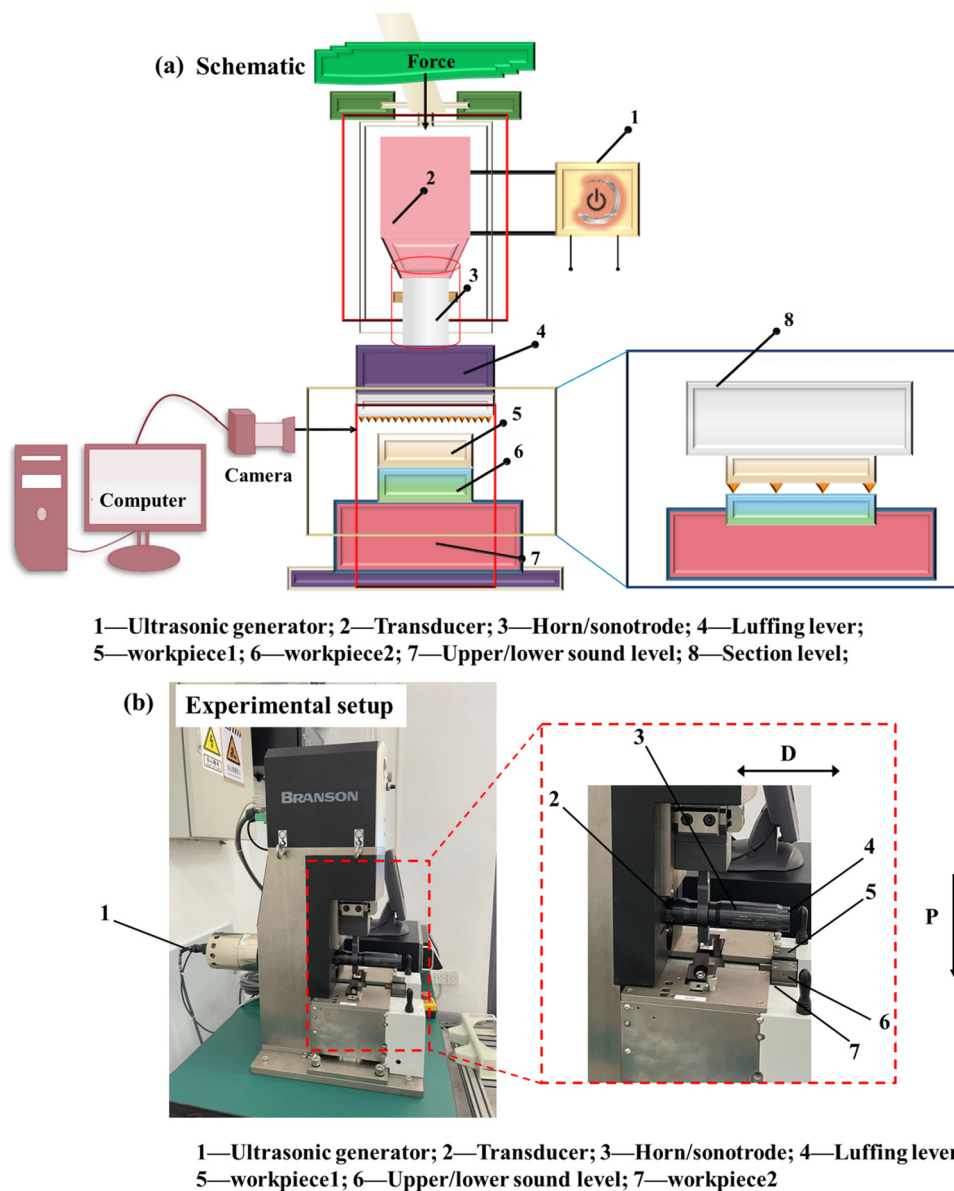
The construction of ultrasonic welding equipment: (a) schematic diagram and (b) experimental setup photograph.
